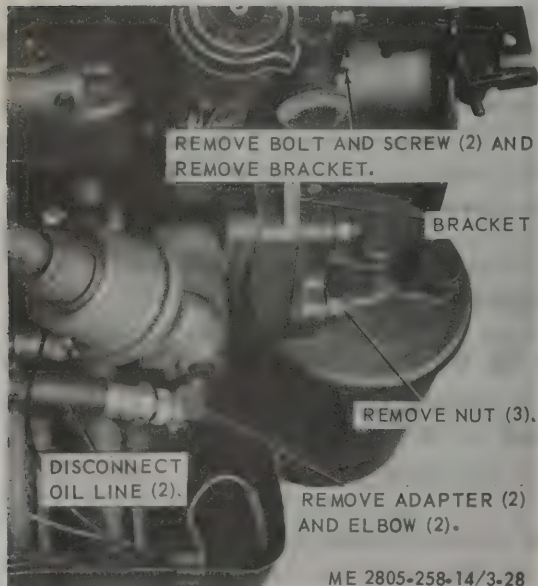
Oil filter, bracket, and lines, removal and installation.
